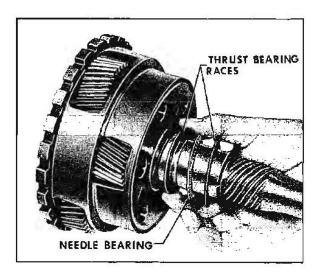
Installing Planet Carrier Thrust Bearing and Races
